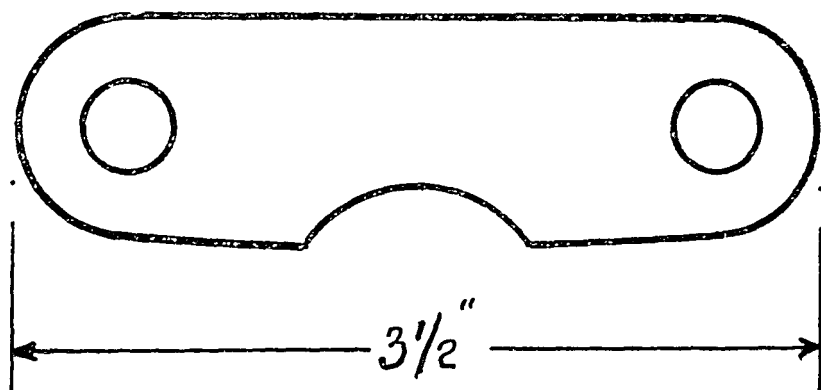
STAMPING WITH FOLLOW-ON TOOLS
